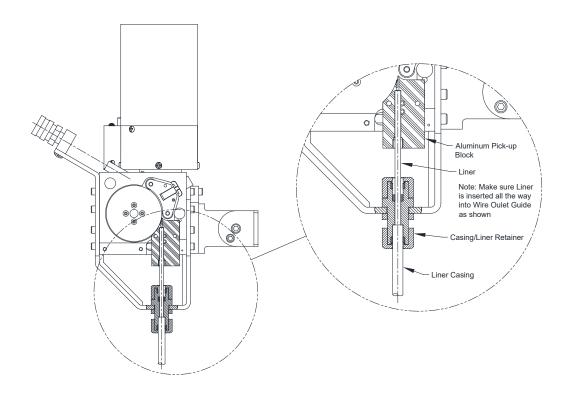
Liner and Casing Installation on WF-200 with Aluminum Wire Pick-up Block Kit
